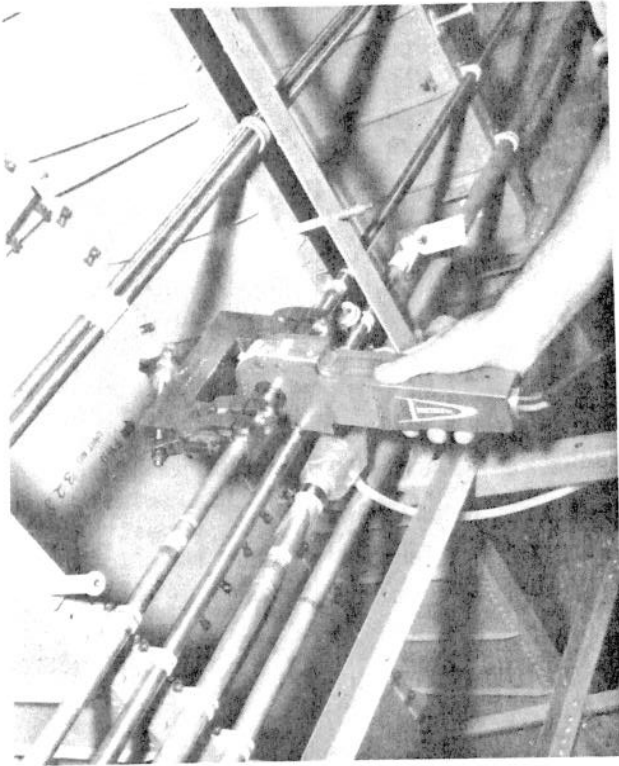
TYPICAL COMMERCIAL INPLACE GTA TUBE WELDING HEAD WITH AUXILIARY BRIDGE TOOL
